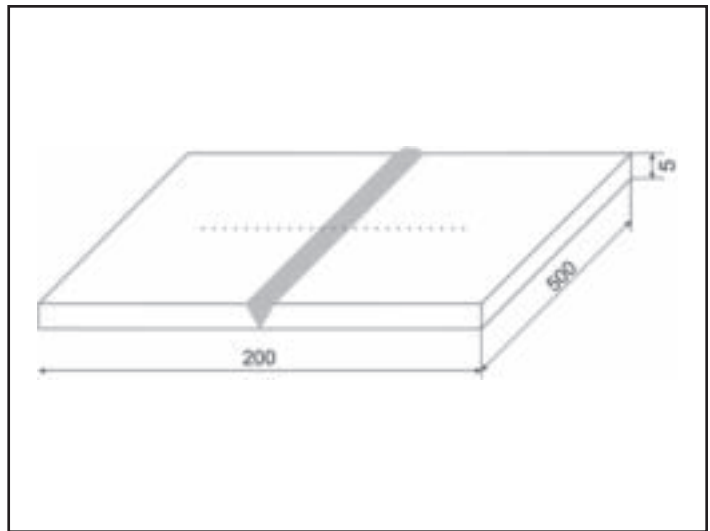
Experimental weld schematic with plate dimensions in mm. Dotted line indicates location of residual stress measurements.
